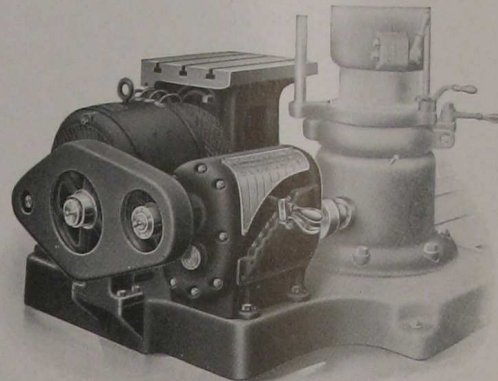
Constant Speed Motor Drive thru Speed Box.
